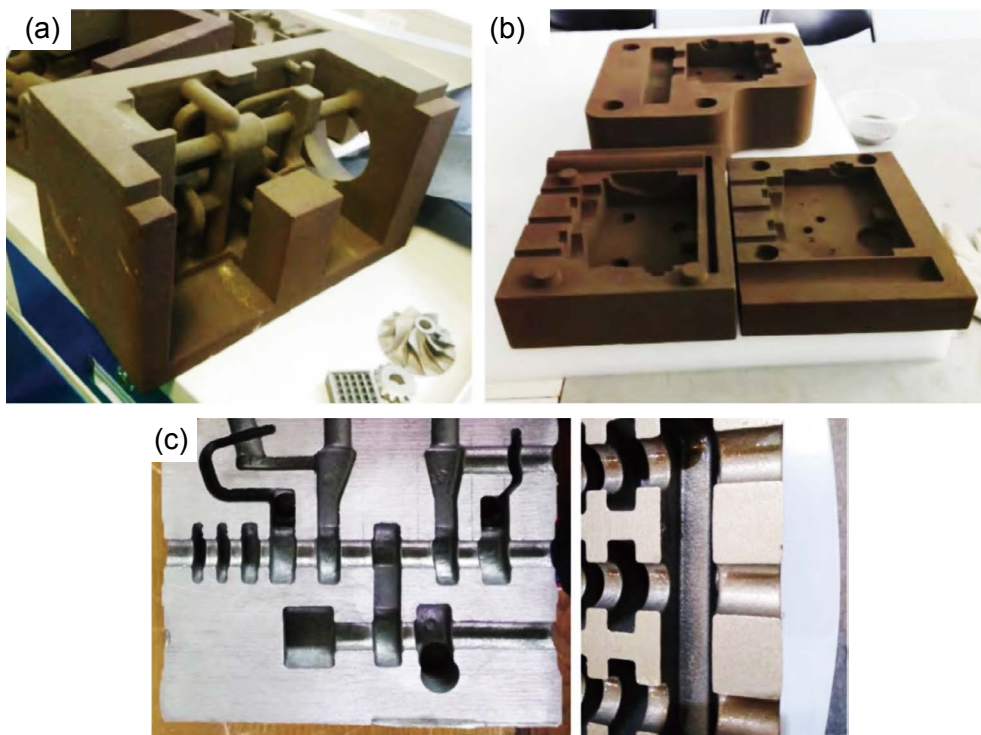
SLS and sand casting: (a, b) sand mold of hydraulic multi way valve; (c) hydraulic valve casting blank [26]
